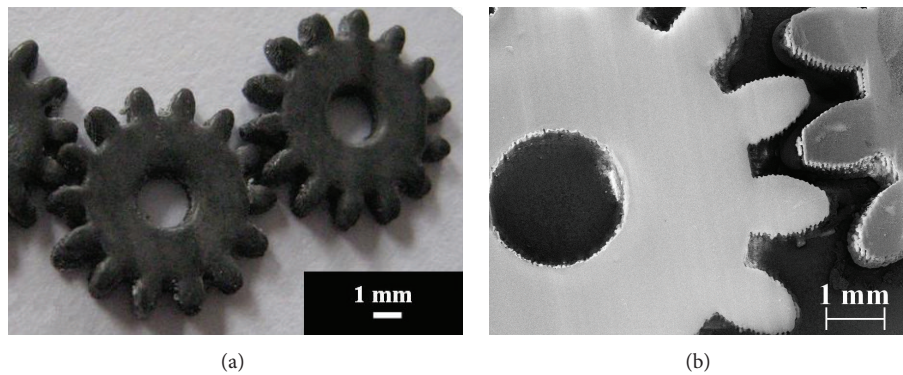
Printed Si_3N_4 gearwheels (green) (a). SEM picture of sintered Si_3N_4 gearwheels (b) [37].
